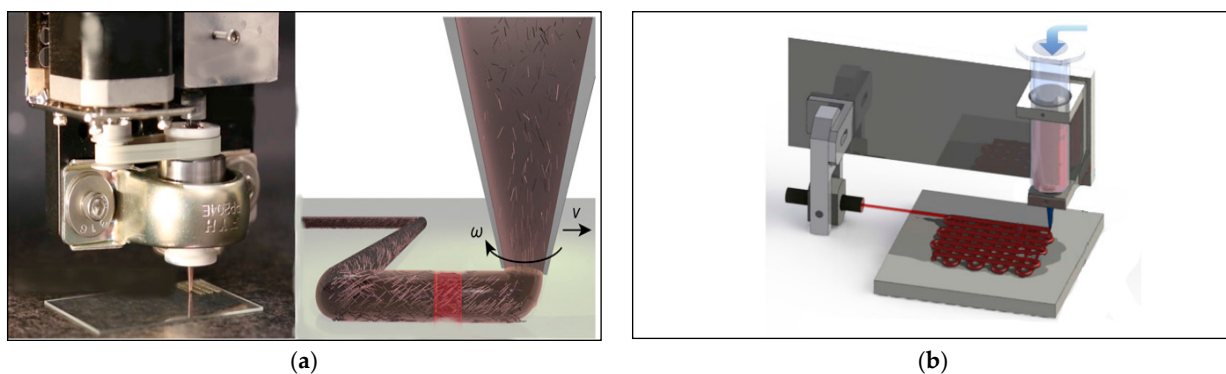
3D printer auxiliary equipment. (a) Rotating auxiliary devices [24]; (b) Laser auxiliary devices [23].
